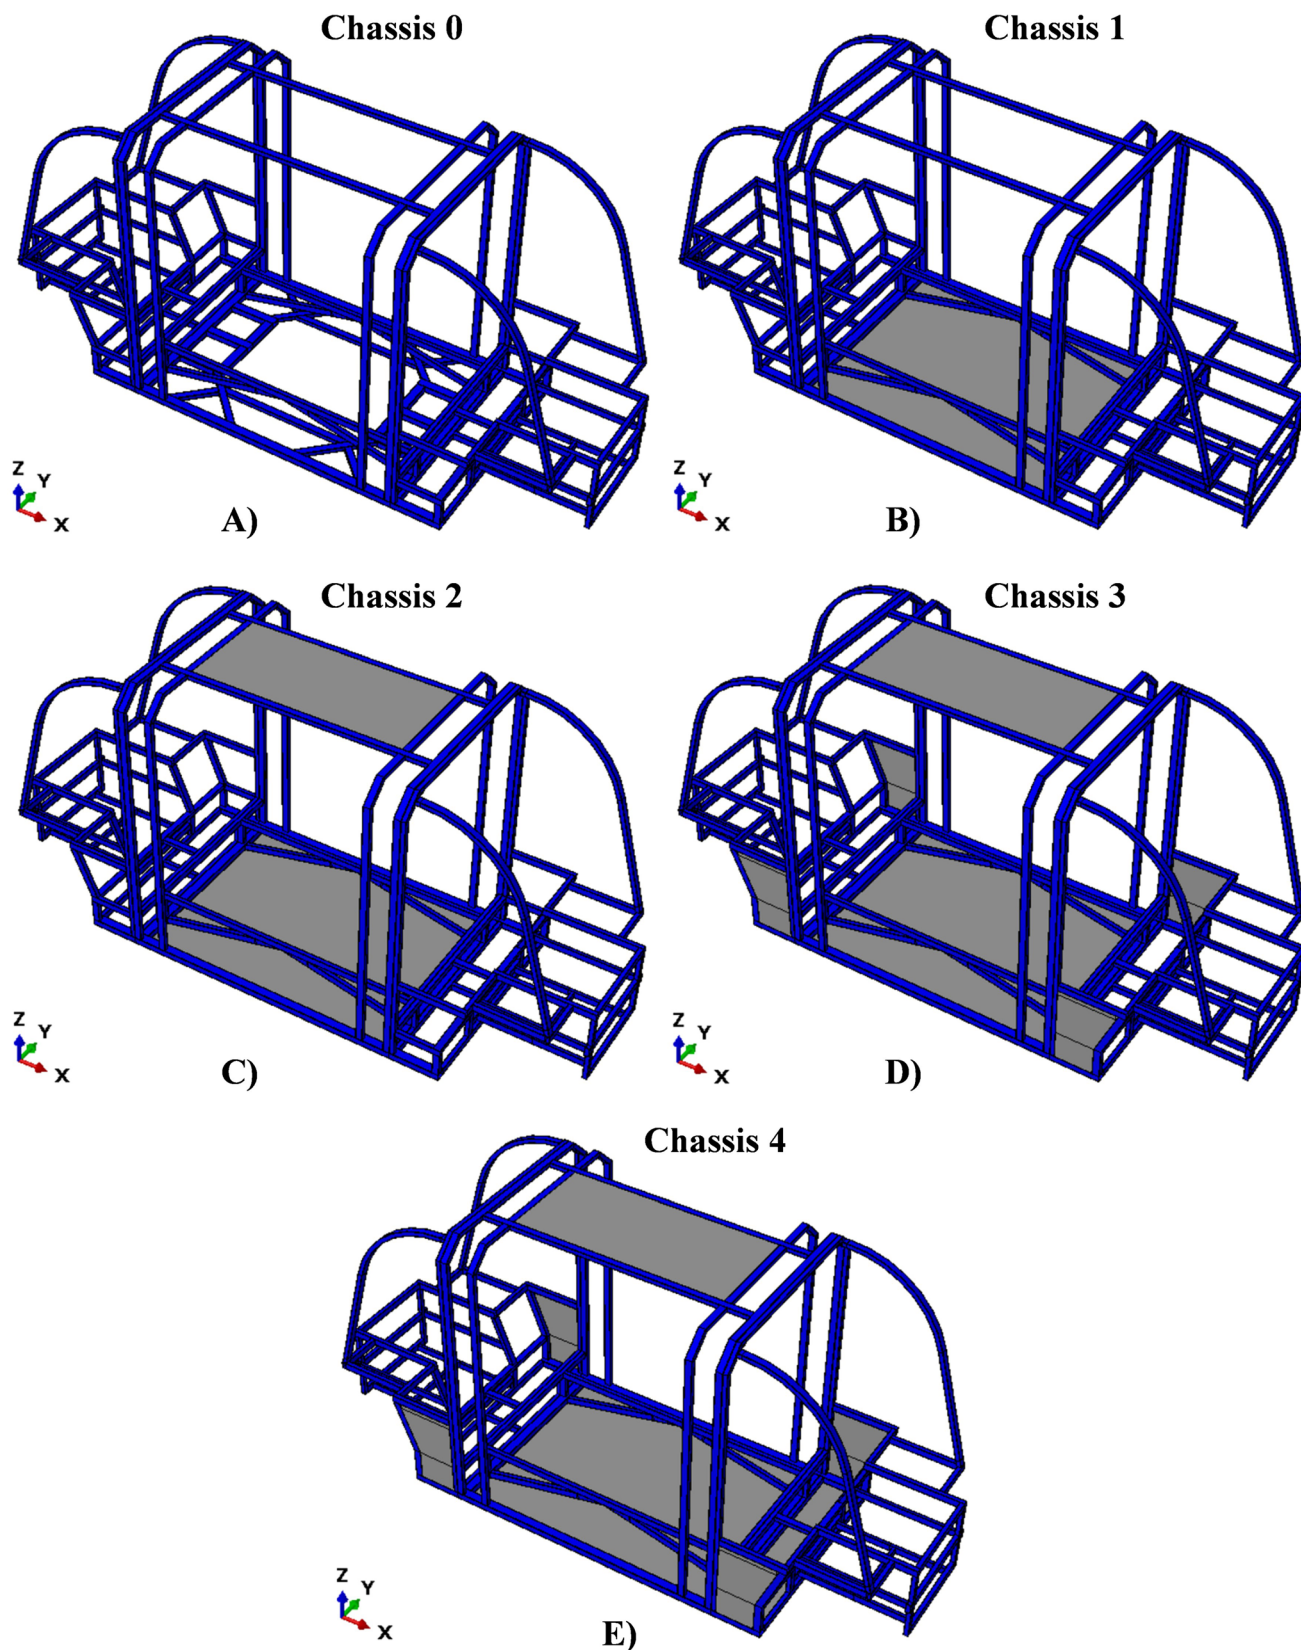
Chassis configurations: (A) Chassis 0; (B) Chassis 1; (C) Chassis 2; (D) Chassis 3; (E) Chassis 4
